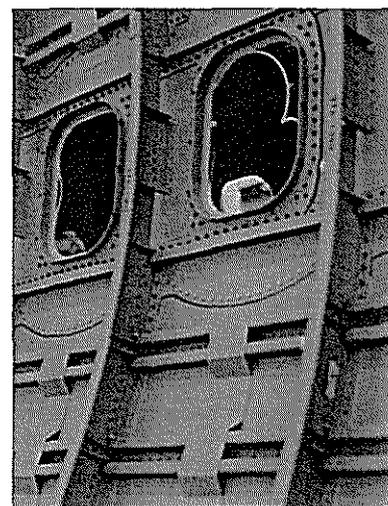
B767's fuselage constructed with frames, skins and taper-rolled stringers
